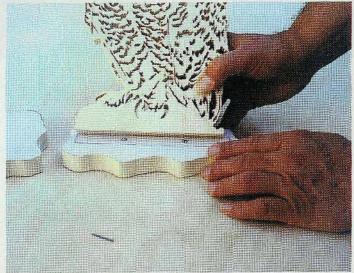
Marking for guide holes on the bottom of the smaller base piece with finishing nails placed through the 1/16" holes in the larger base piece.
